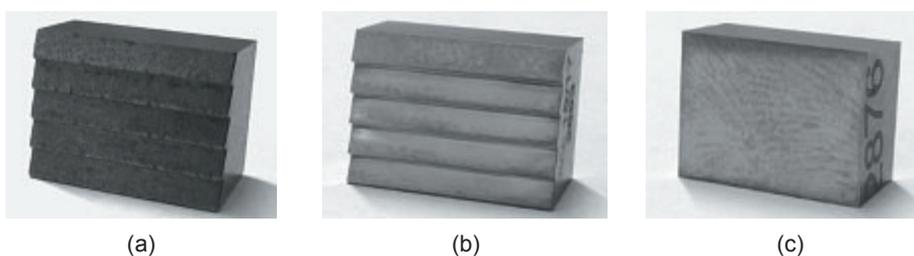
Shows the inserts (a) conventional striped (b) FHP-insert striped (c) FHP-insert non-striped
